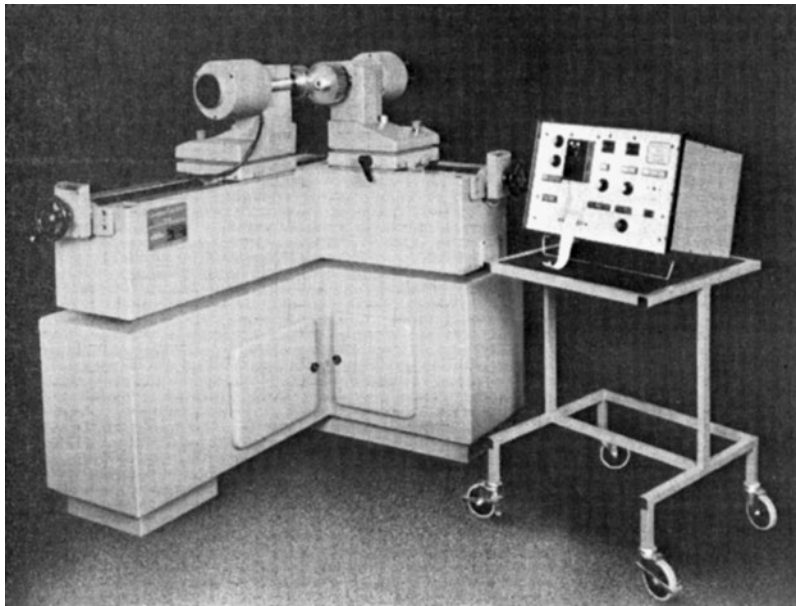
A single-bank testing machine that rolls a master with a gear. (Courtesy of Gleason/Goulder, Huddersfield, U.K., a subsidiary of Gleason Works.)
